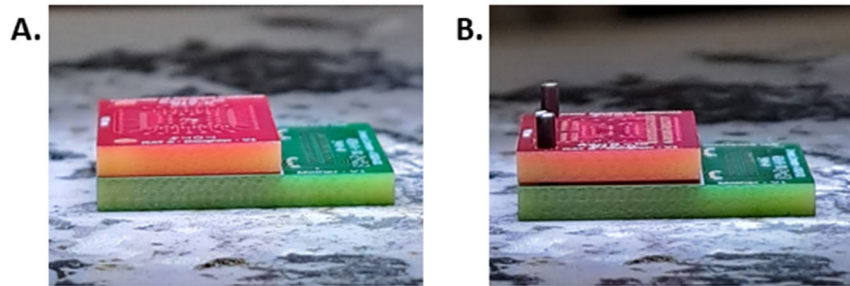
Sideview of interconnected Mother-to-Daughter PCBs with (A) and without (B) pressure applied on Daughter (red) PCB. Assembly without applied pressure (B) resulted in failure as evidenced by the separation visible between the two boards.
